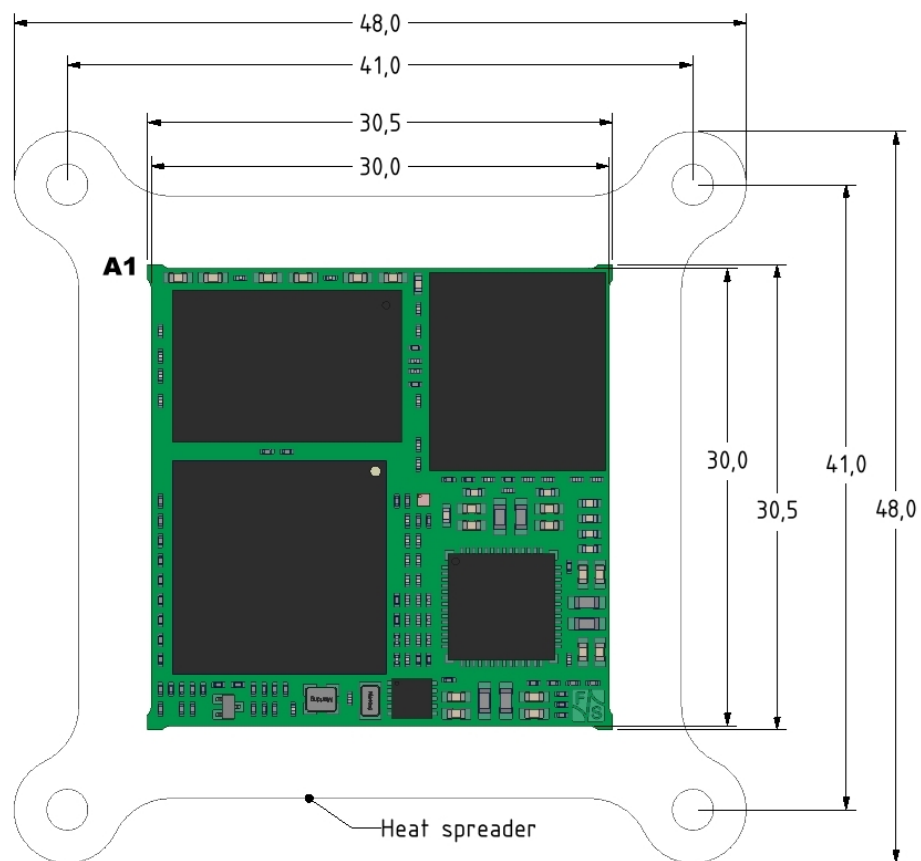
OSM8MM top view with heat spreader, all dimensions in mm
